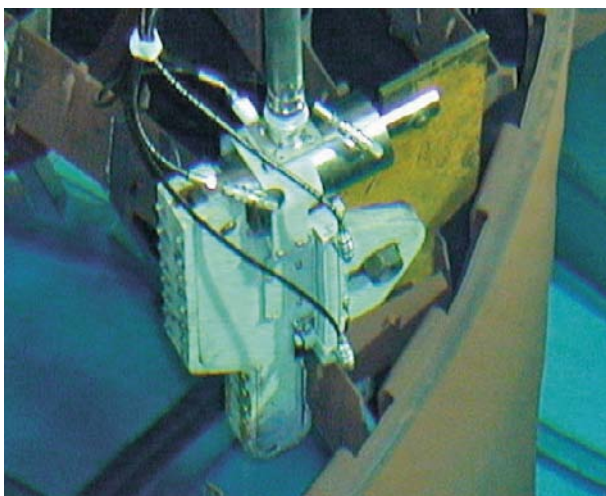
Hydraulic Shears being used for cutting of the Core Grid removed from the Forsmark Nuclear Power Plant.
